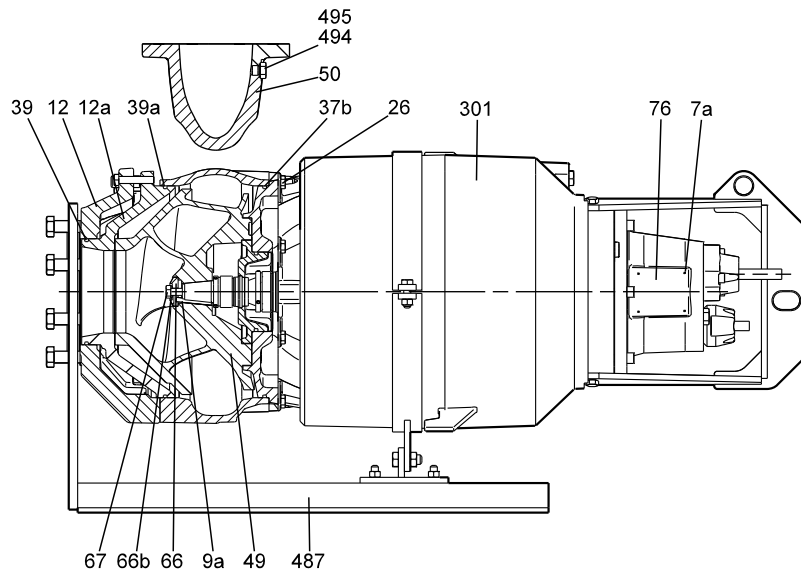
Installation type H, dry, horizontal pump on base stand - S-tube impeller
